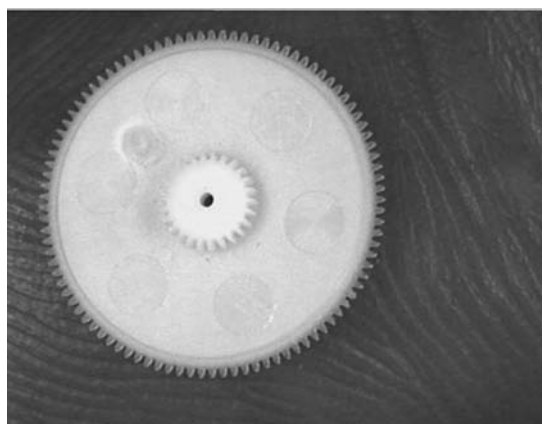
Gear wheel with bearing hole (diameter 0.2 mm).
